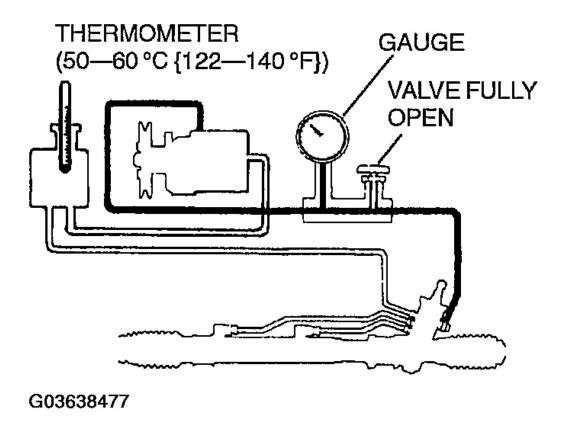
Measuring Fluid Pressure Courtesy of MAZDA MOTORS CORP.
